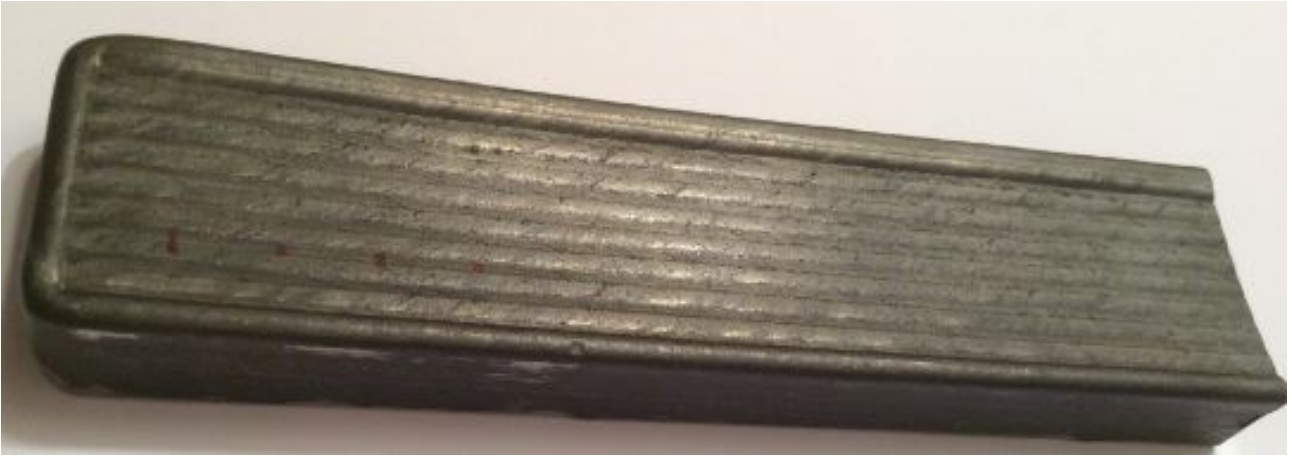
Additive manufactured flat bar specimen 200x30x14 mm.
